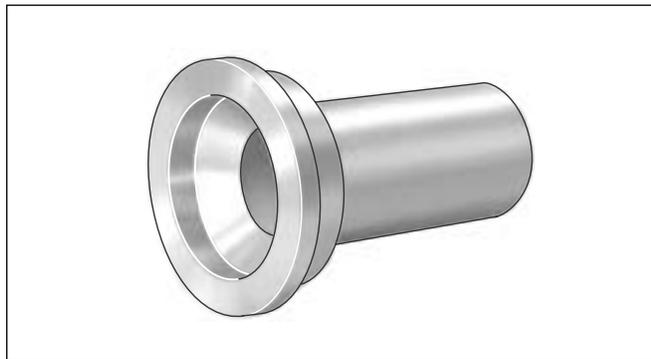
Sprocket Shaft Oil Seal Installer (Part No. HD-39361A)
